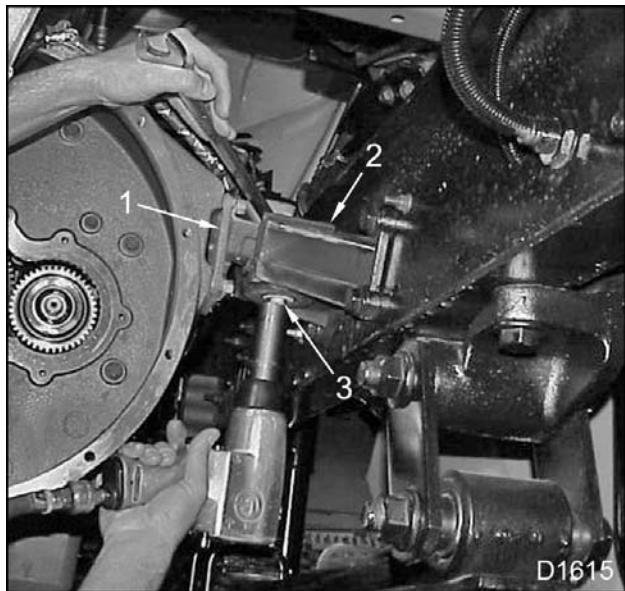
Removal of through bolt from rear engine mount in chassis mounting bracket
